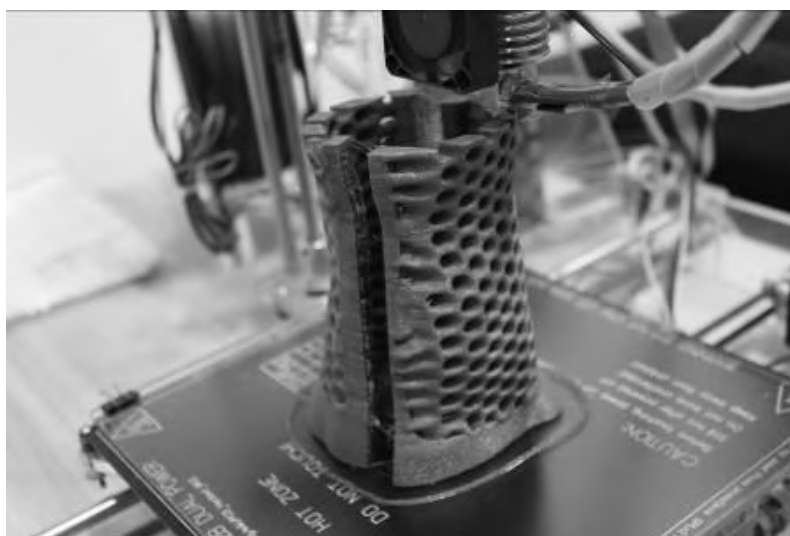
3D printing of an Orthosis by the technique of Additive Manufacturing.
